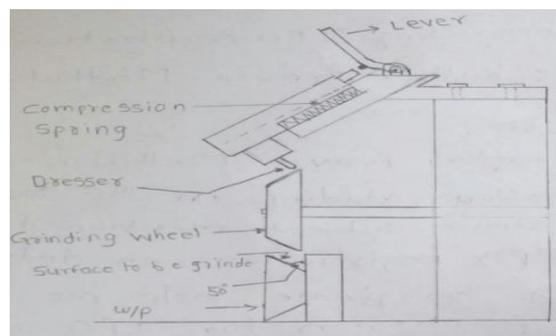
Sliding of Diamond Tool by using Dovetail sliding joint
